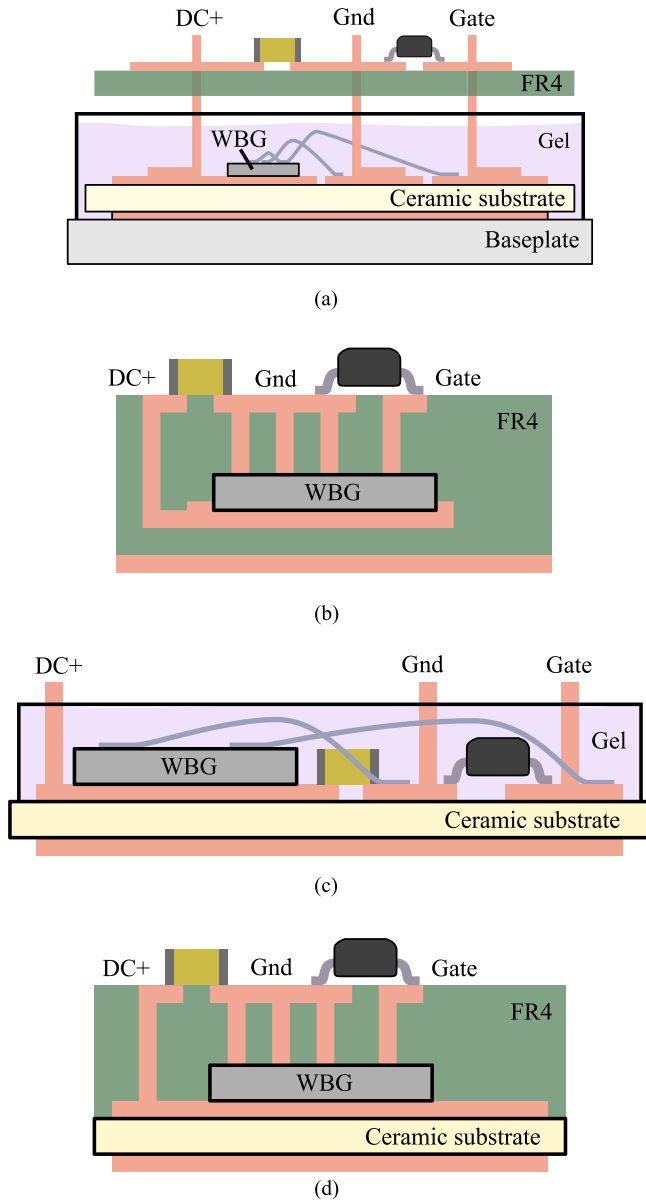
Packaging technologies. (a) Conventional power module structure. (b) PCB embedded die technology. (c) Integrated DBC power module structure. (d) PCB/DBC hybrid power module structure.
